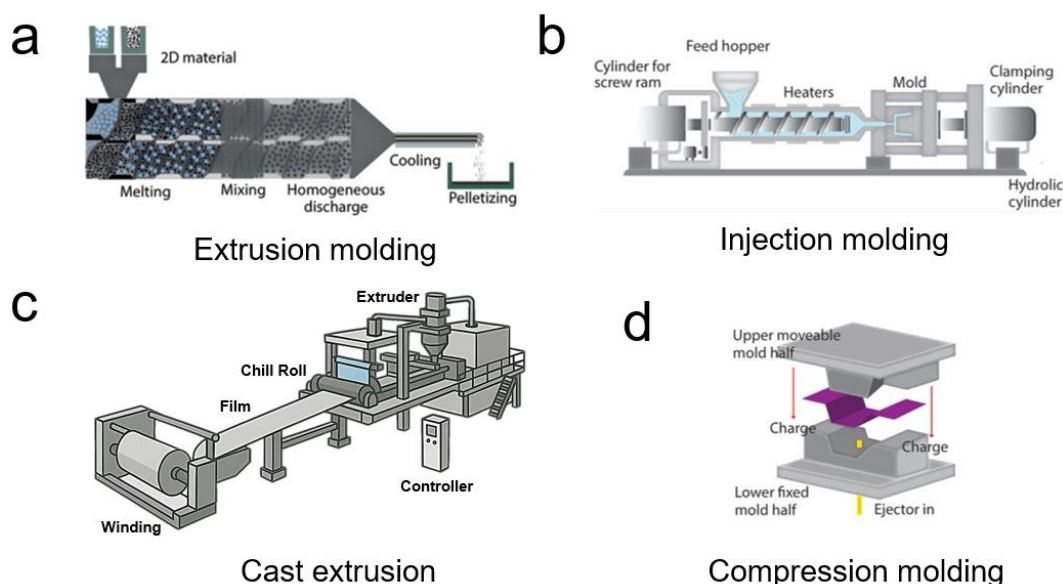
Schematics of common plastic manufacturing techniques. (a) Extrusion molding, (b) injection molding, (c) cast extrusion, and (d) compression molding ¹⁴⁸.
